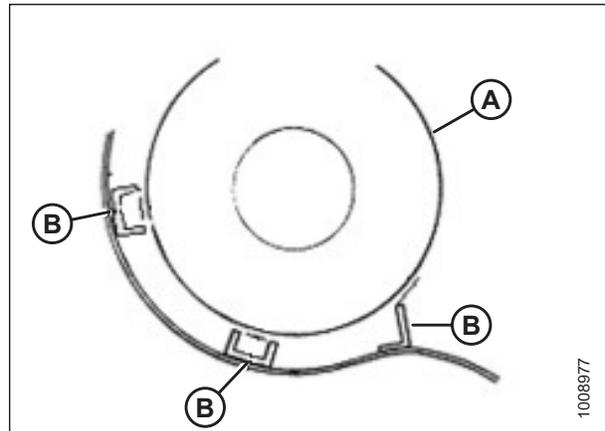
End View Diagram Showing Auger and Stripper Bars
